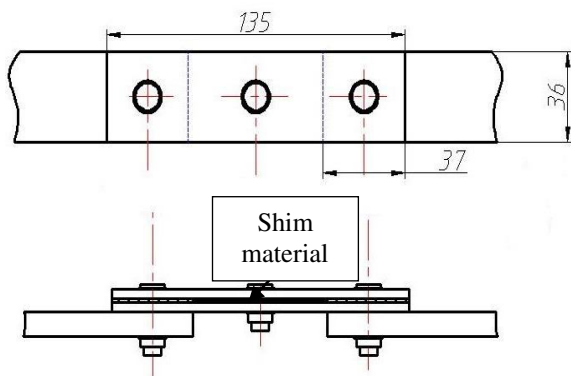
Dimensions in mm for the open-hole composite-aluminum bolted joint compressive model with a shim material.
